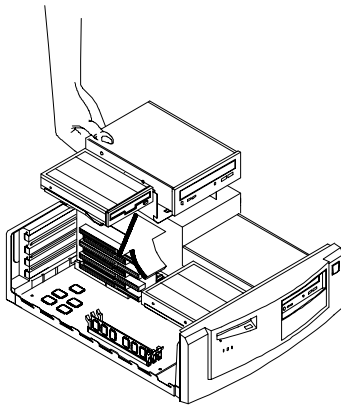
Removing the Drive Frame with CD-ROM and 3.5-inch Diskette Drives
